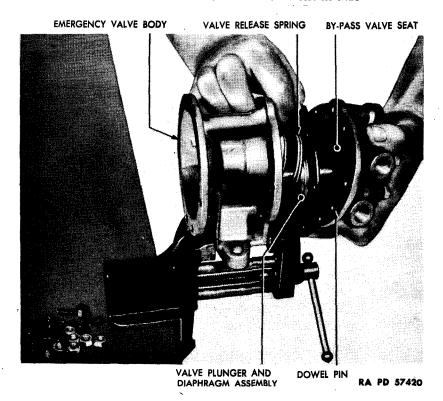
Removing Valve Body and Valve Plunger Assembly
